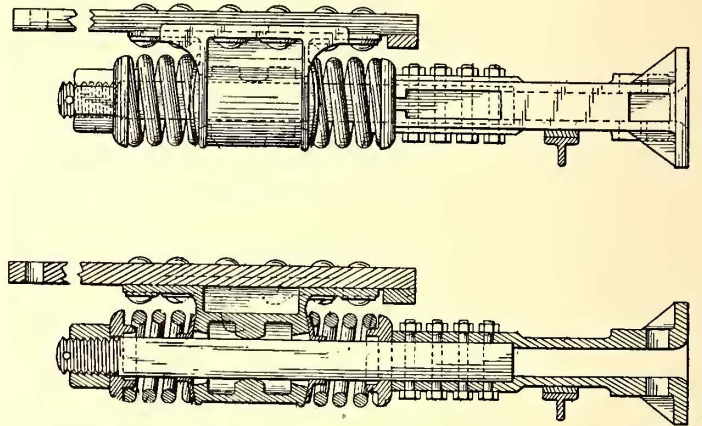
SHAFT RIGGING PROVIDING FOR UP AND DOWN MOTION OF DRAW-BAR
